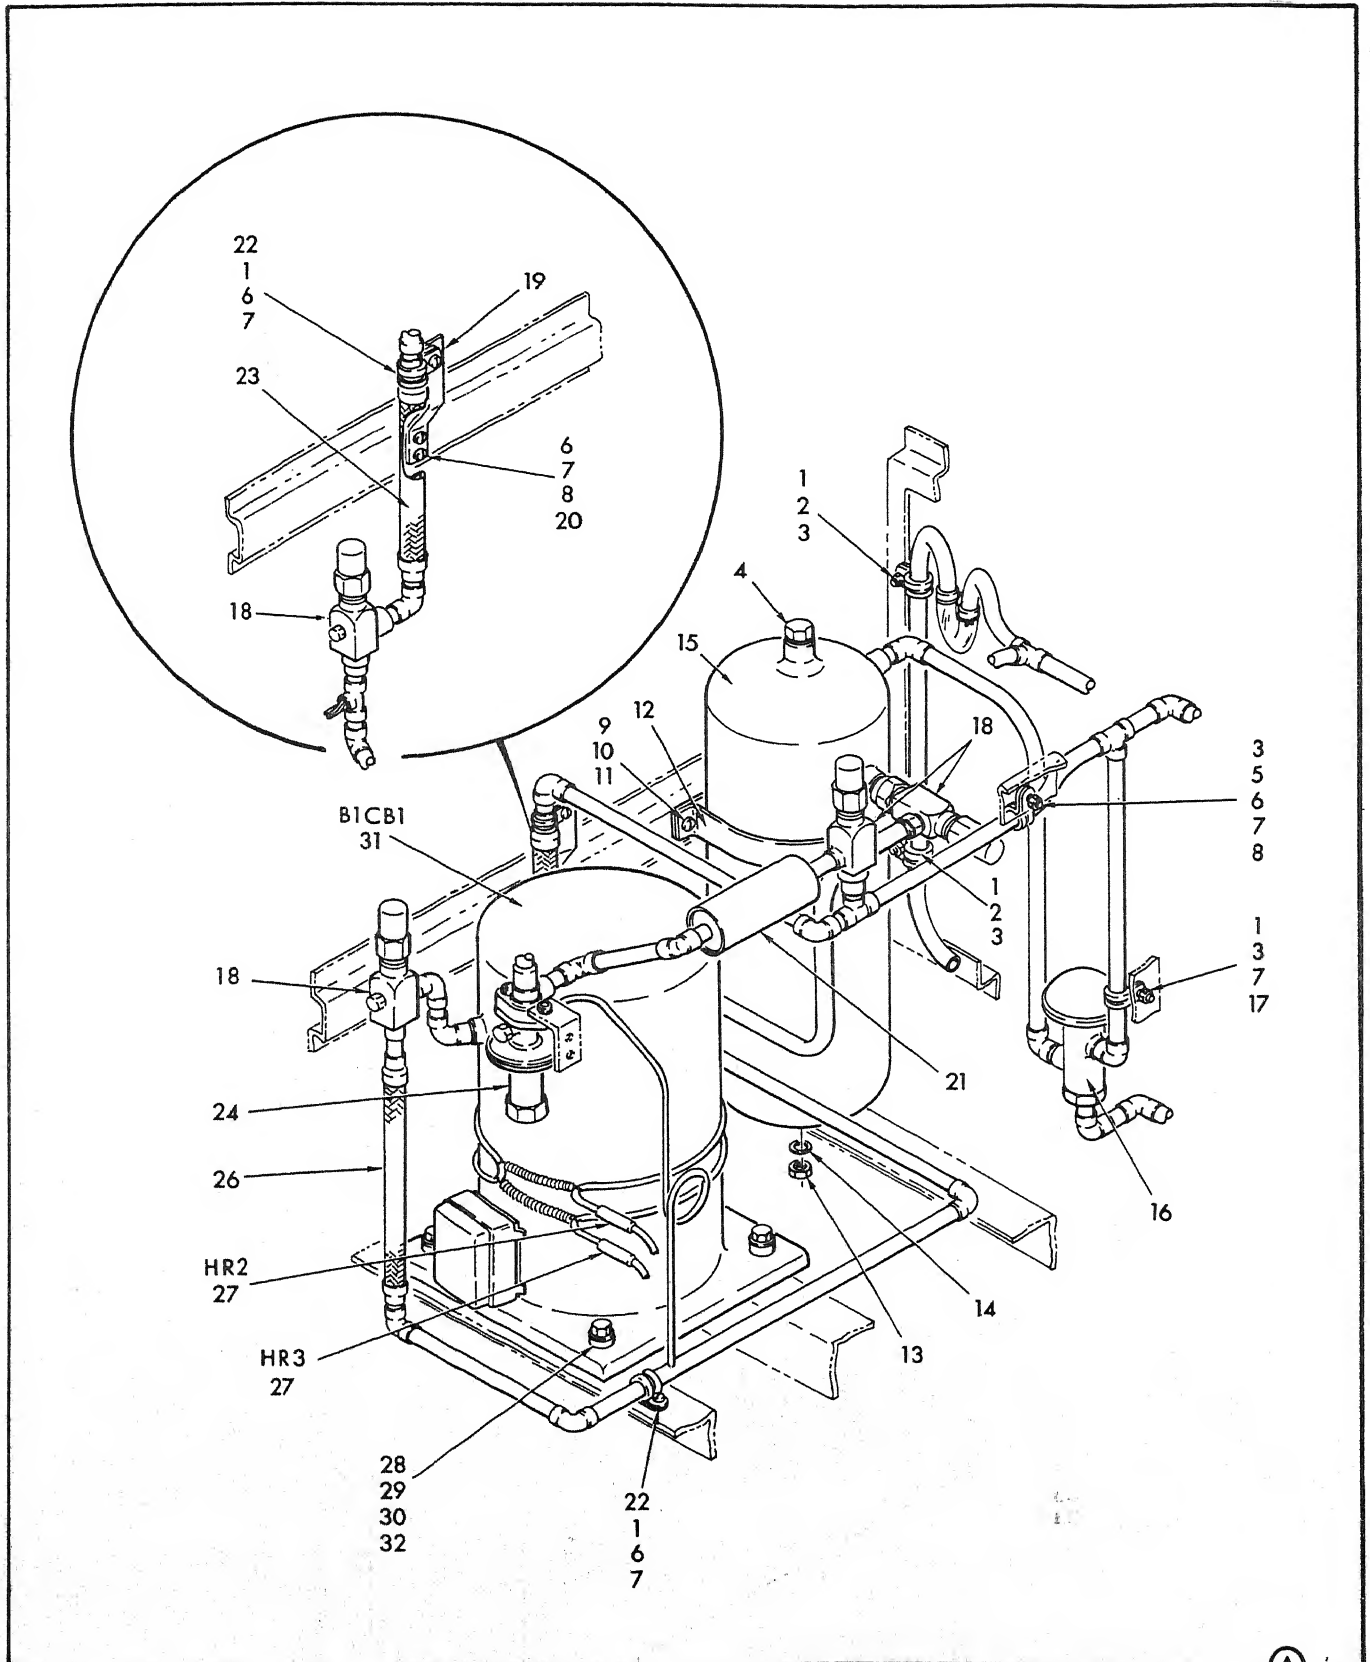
COMPRESSOR SECTION (SHEET 2 OF 2)
